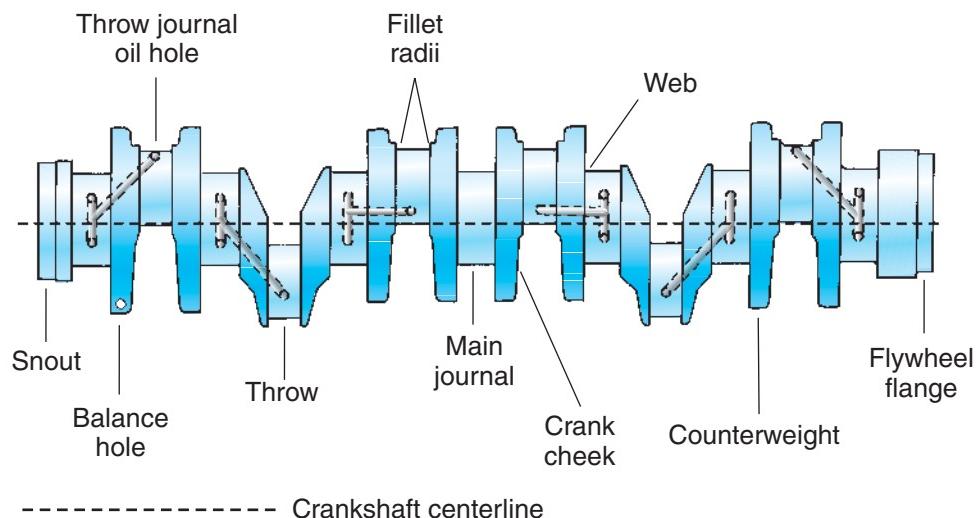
Crankshaft terminology. (Courtesy of Caterpillar)
